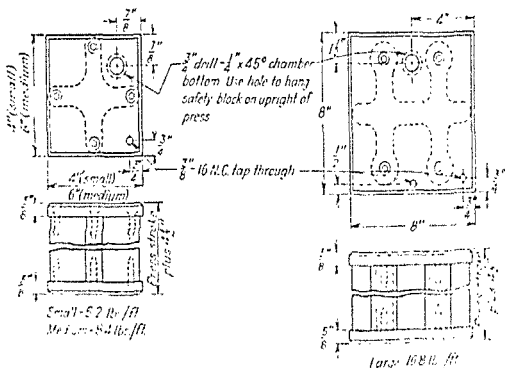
Ram blocks made of magnesium extrusions and aluminum end plate. (Ford Motor Co.)
